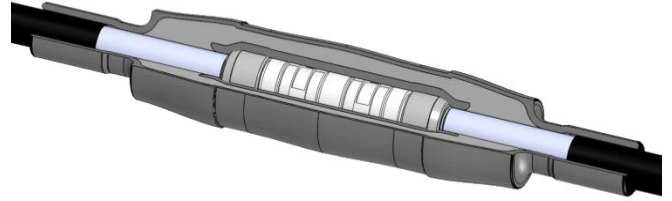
Install flow-through threaded seal kit and cold-shrink splice housings.
